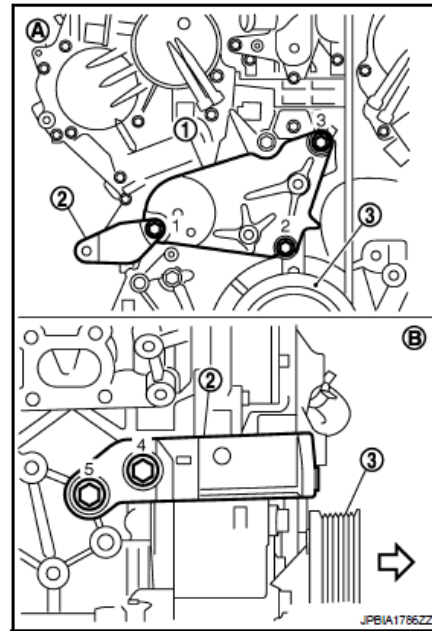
Identifying Power Steering Oil Pump Bracket And Idler Pulley Bracket
